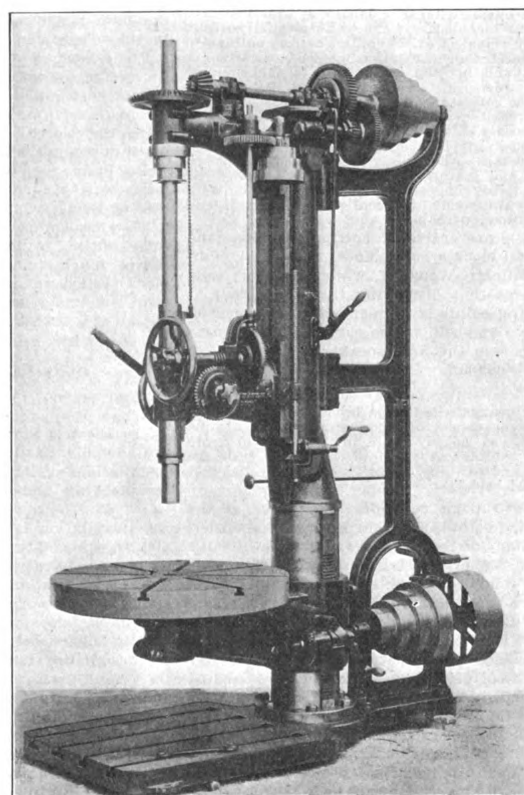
Upright Drill, New Haven Manufacturing Company.
